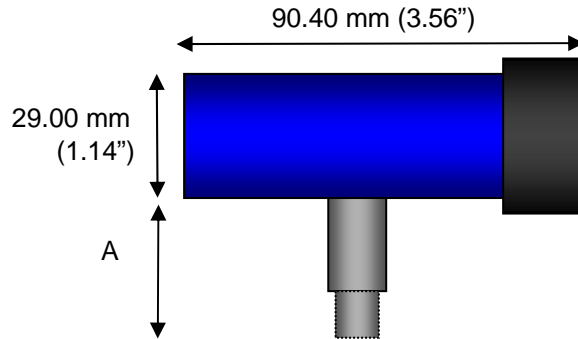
KJLC275 Convection Gauge Tube Dimensions
